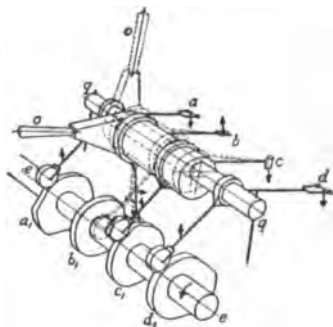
Usual method of actuating valve gears of Diesel engines having four-stroke cycle.
